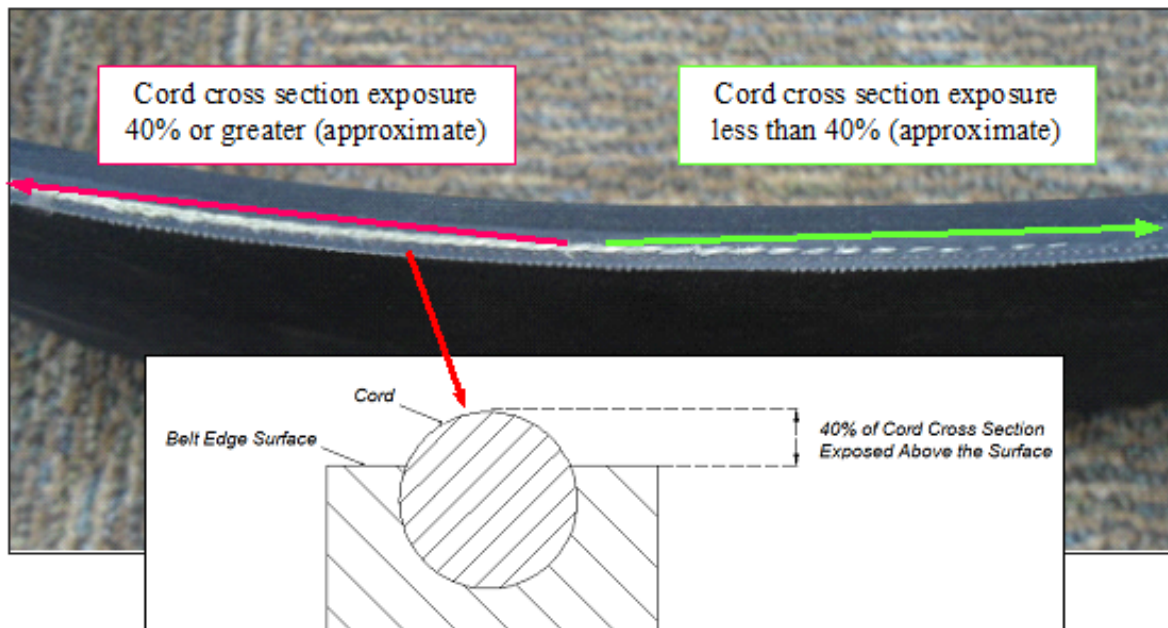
Drive Belt Visual Inspection – Exposed Cord Limit Criteria
